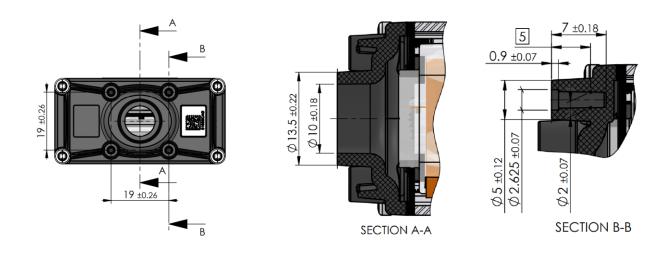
Inlet interface dimensions. Screw tower dimensions correspond with screw EJOT Delta PT^* , diameter 2.5 mm.
